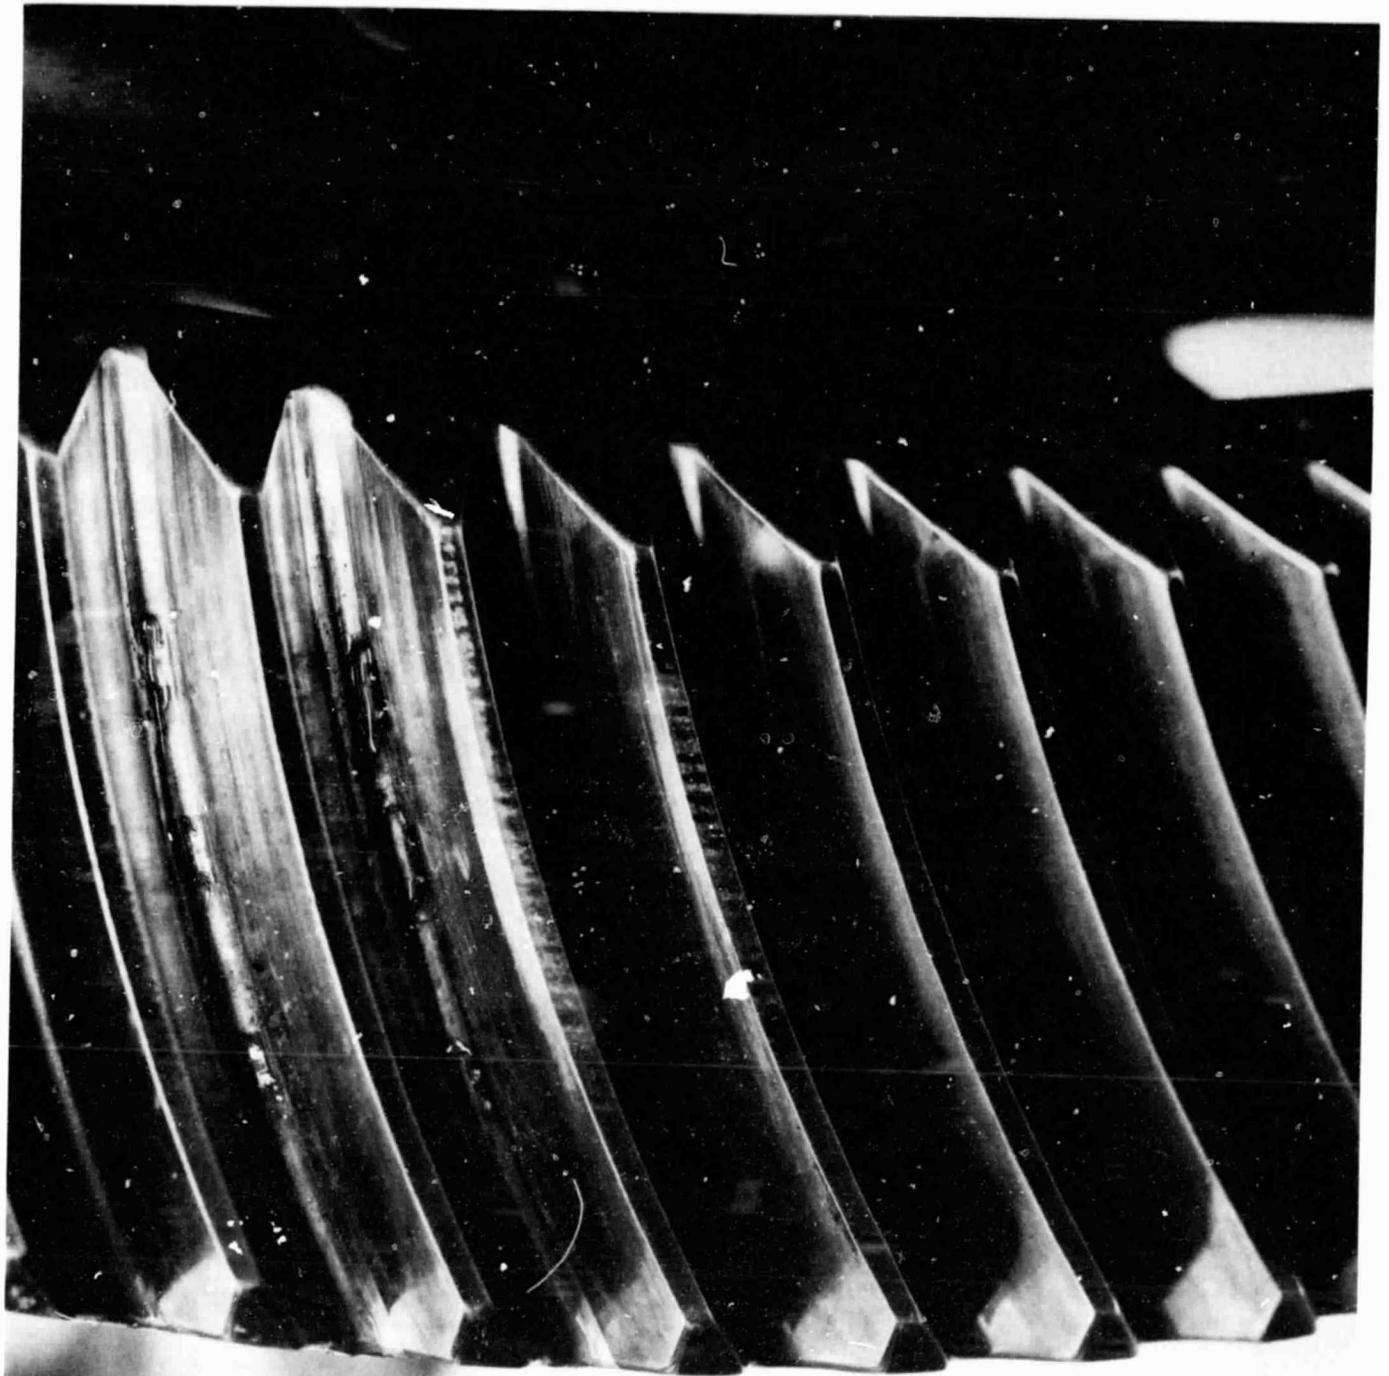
BEVEL GEAR GAGES IN BEVEL TOOTH ROOTS
